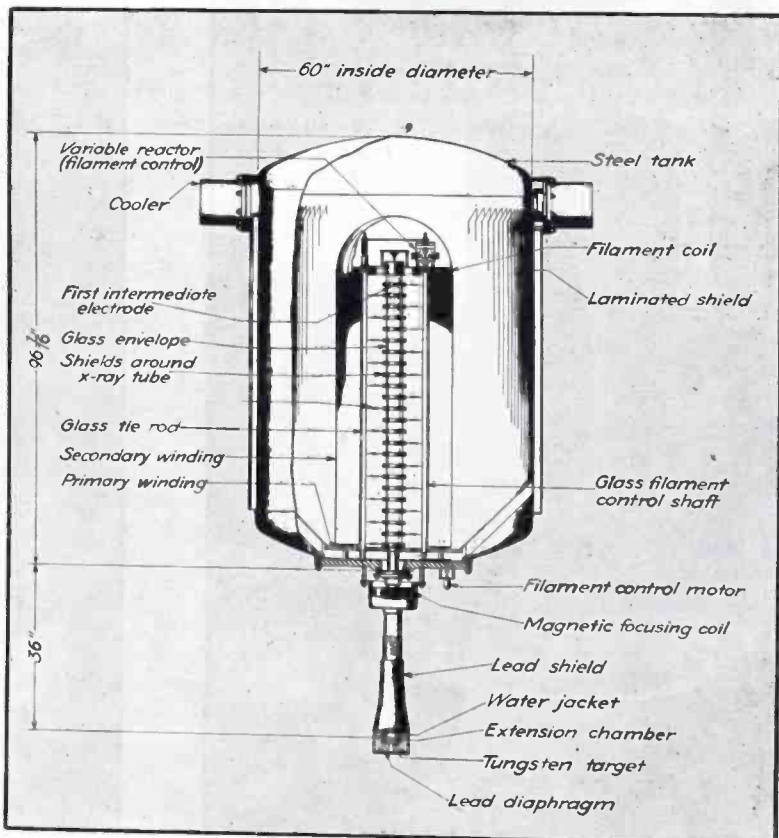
This cutaway drawing shows the construction of the two million volt x-ray unit
